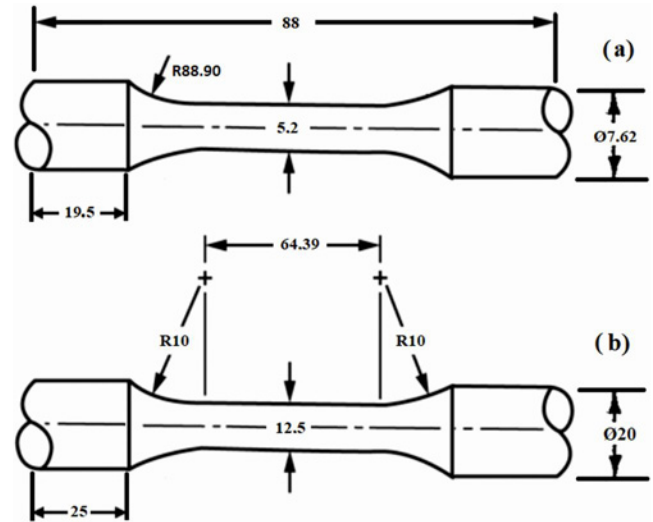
A sample for (a) fatigue tests and (b) tensile tests (dimensions in mm).
